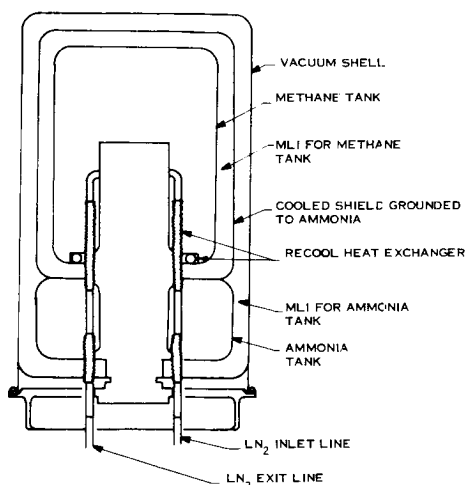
Basic Configuration of Honeywell Solid Cryogen Cooler¹
